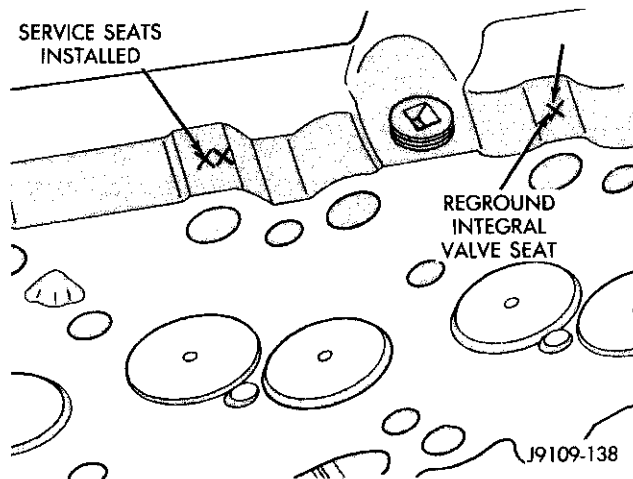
Reworked Cylinder Head Seats—Stamped Identification
